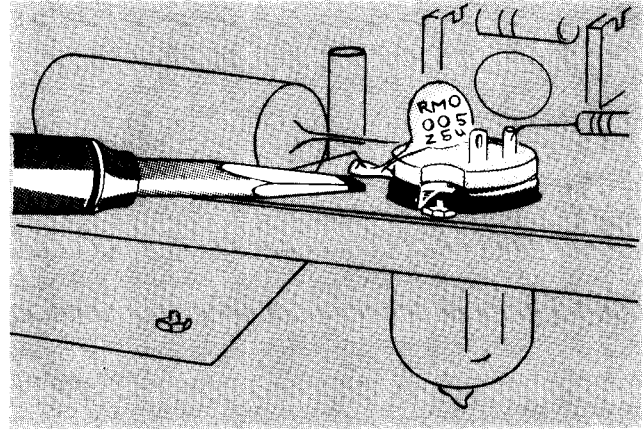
Soldering to a terminal. Note the slight fillet of solder--exaggerated for clarity--formed around the wire.
